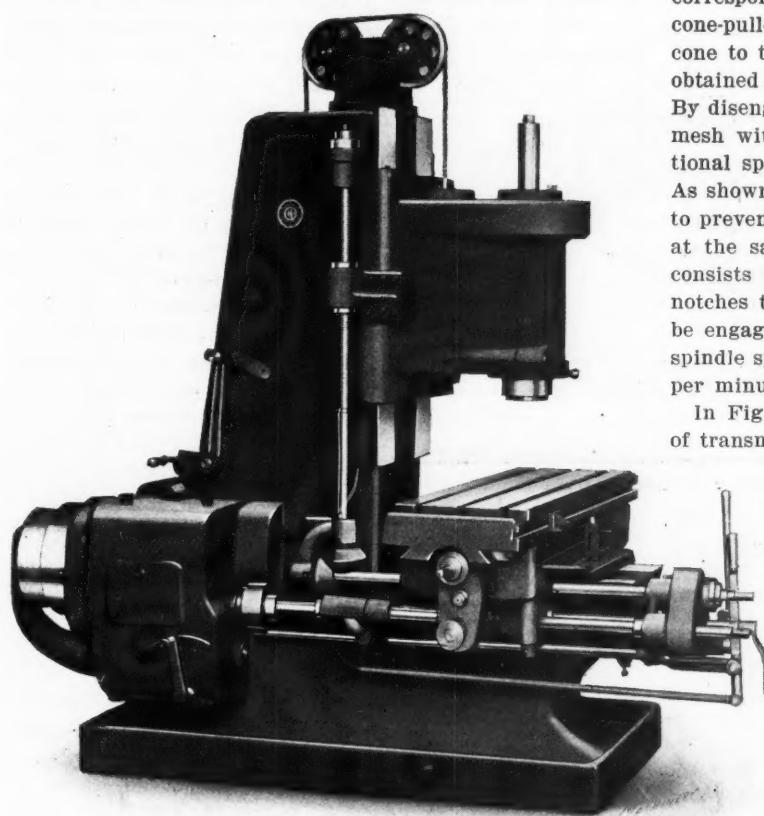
Vertical Milling Machine, built by the Rockford Machine Tool Co.
